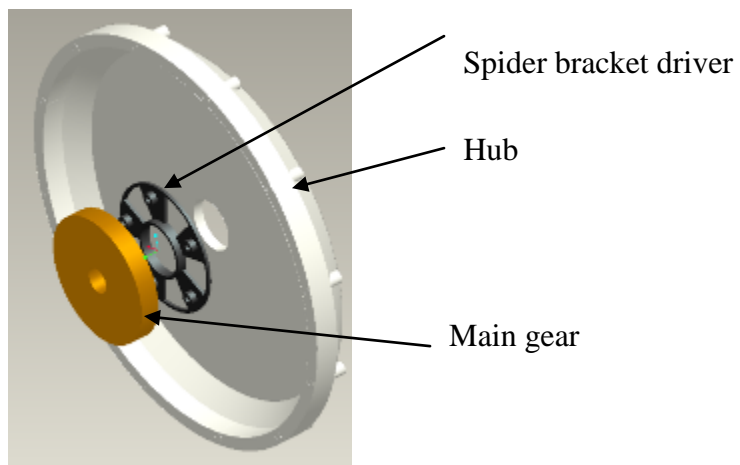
Main gear, spider bracket driver and hub exploded assembly
